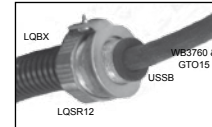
Make sure USSB is fully inserted into central part of LQSR12 connector
